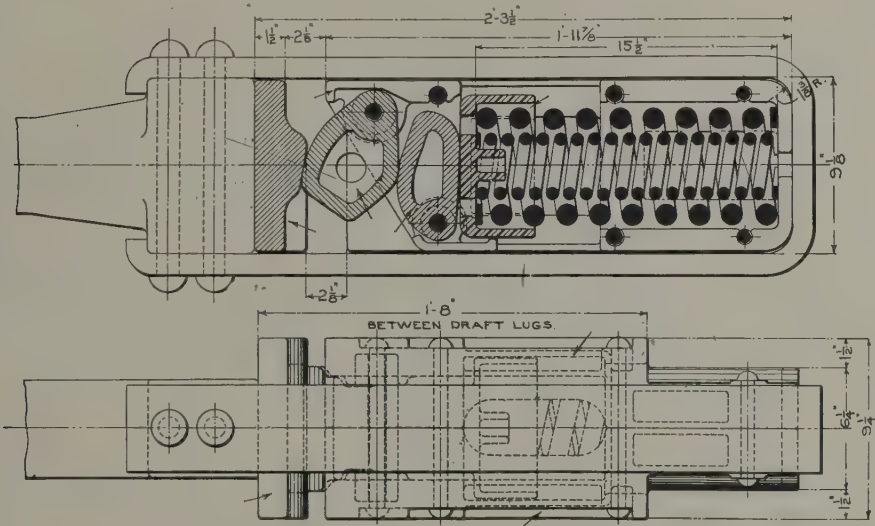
General Arrangement of McCord Draft Gear, Type D.
